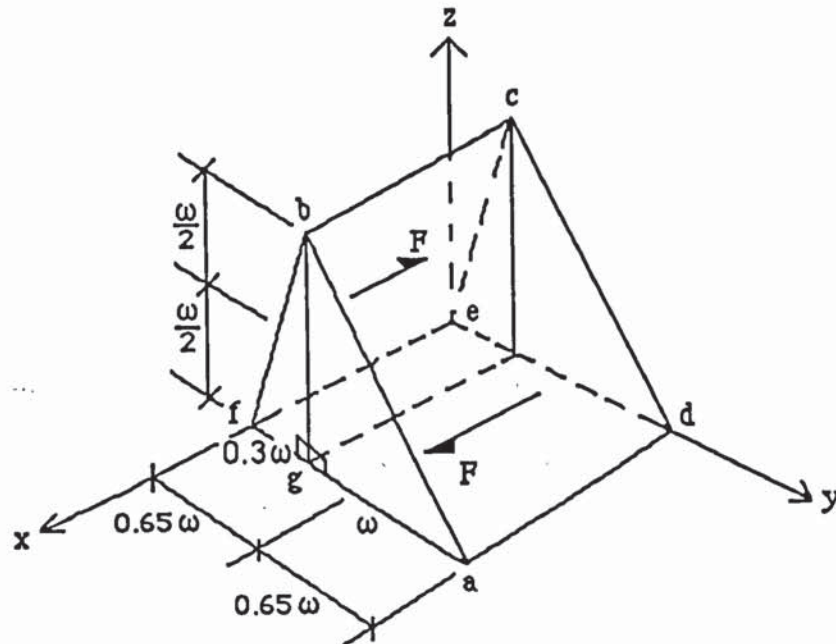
Shear forces acting on weld abcdef.
